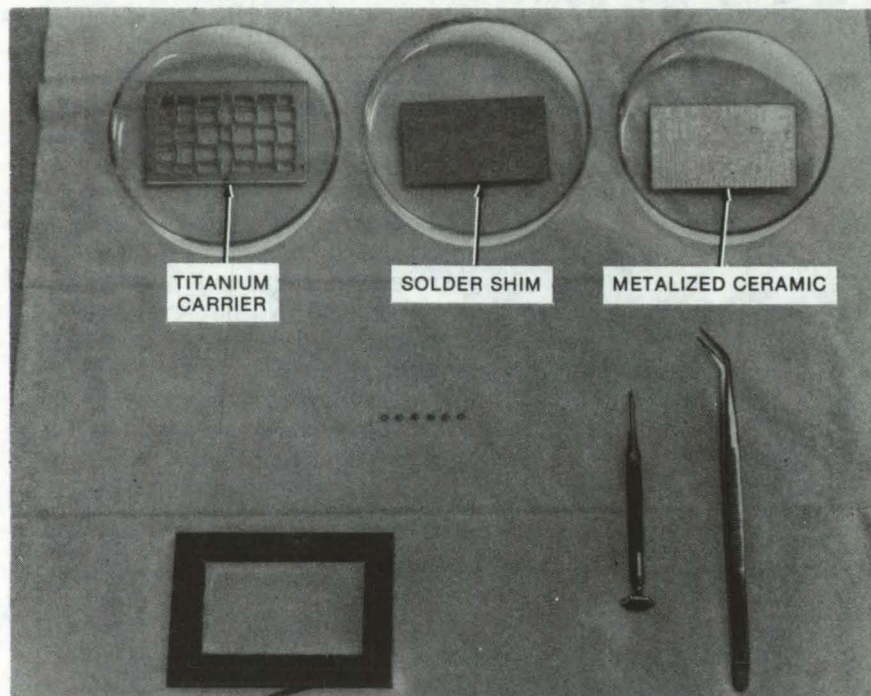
Parts To Be Soldered are cleaned and then stored in petri dishes prior to assembly in the solder fixture (lower left). The titanium carrier is placed in the fixture first, followed by the solder-shim stock and the metalized carrier. The surfaces to be soldered are spray-coated with flux.
